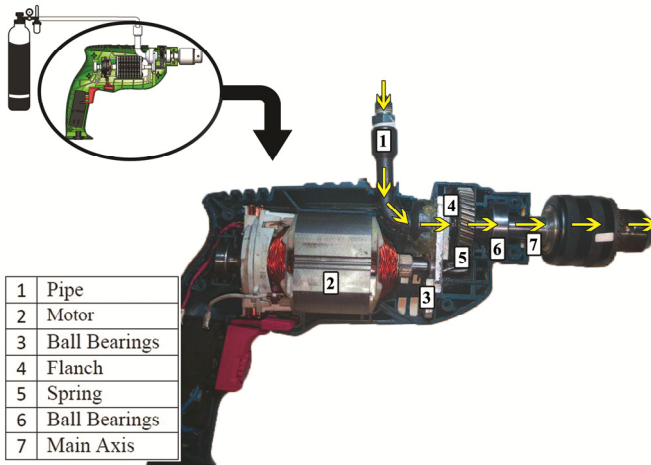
A schema of drilling machine: The section shows the pathway of gas coolant
